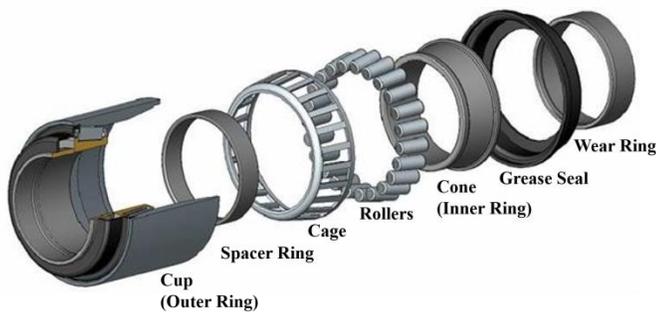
A detailed exploded view of a typical railroad tapered roller bearing assembly
